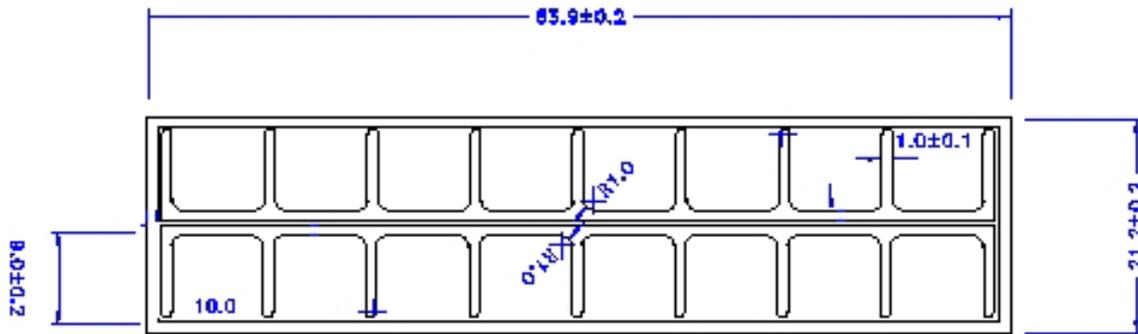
Double-layer design: two small-cell tubes in same sleeve (dimensions are in mm).
